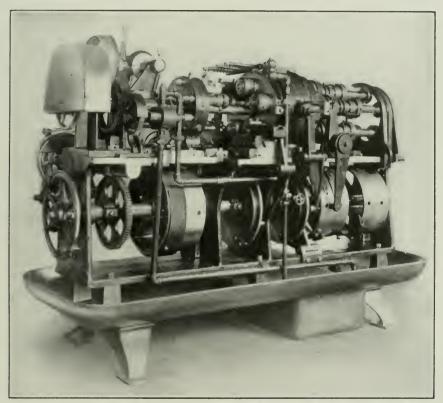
Universal Multiple-Spindle Automatic Screw Machine (Rear View)
